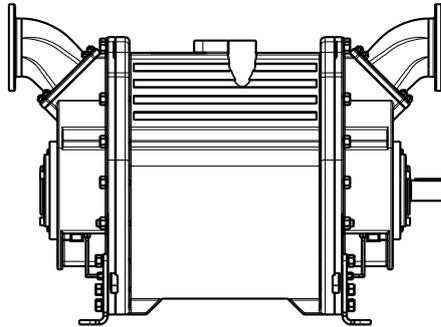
Dimensions of VacuStar WR 2500 / WR 3100, shown here is WR 3100
